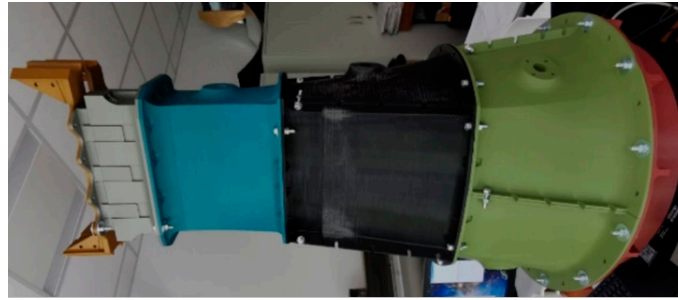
Three-dimensional (3D)-printed assembly of the parts forming the flow section.
